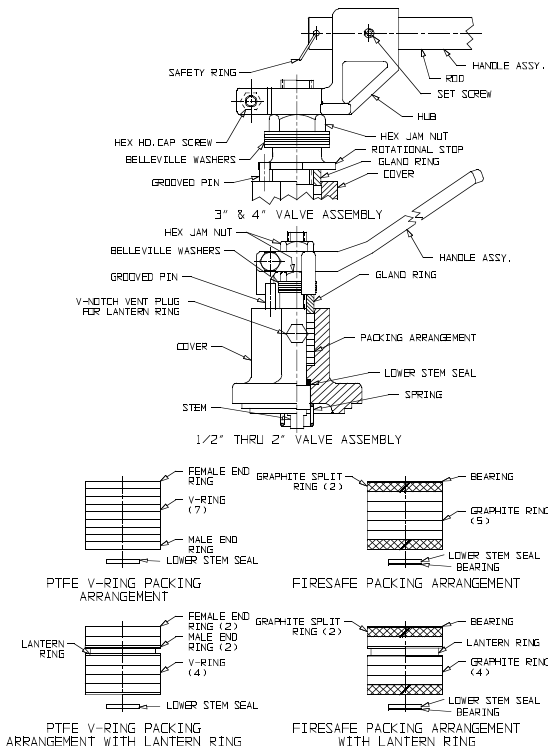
Assembly Drawing: Cam-Tite Ball Valve with Standard Cover
